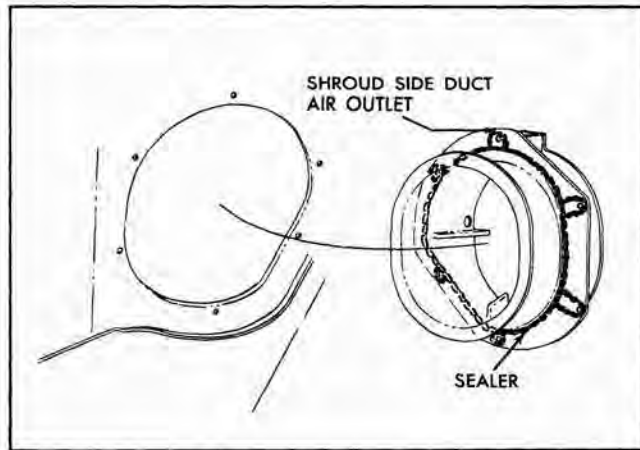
Pontiac—Side Duct Air Outlet Sealing
